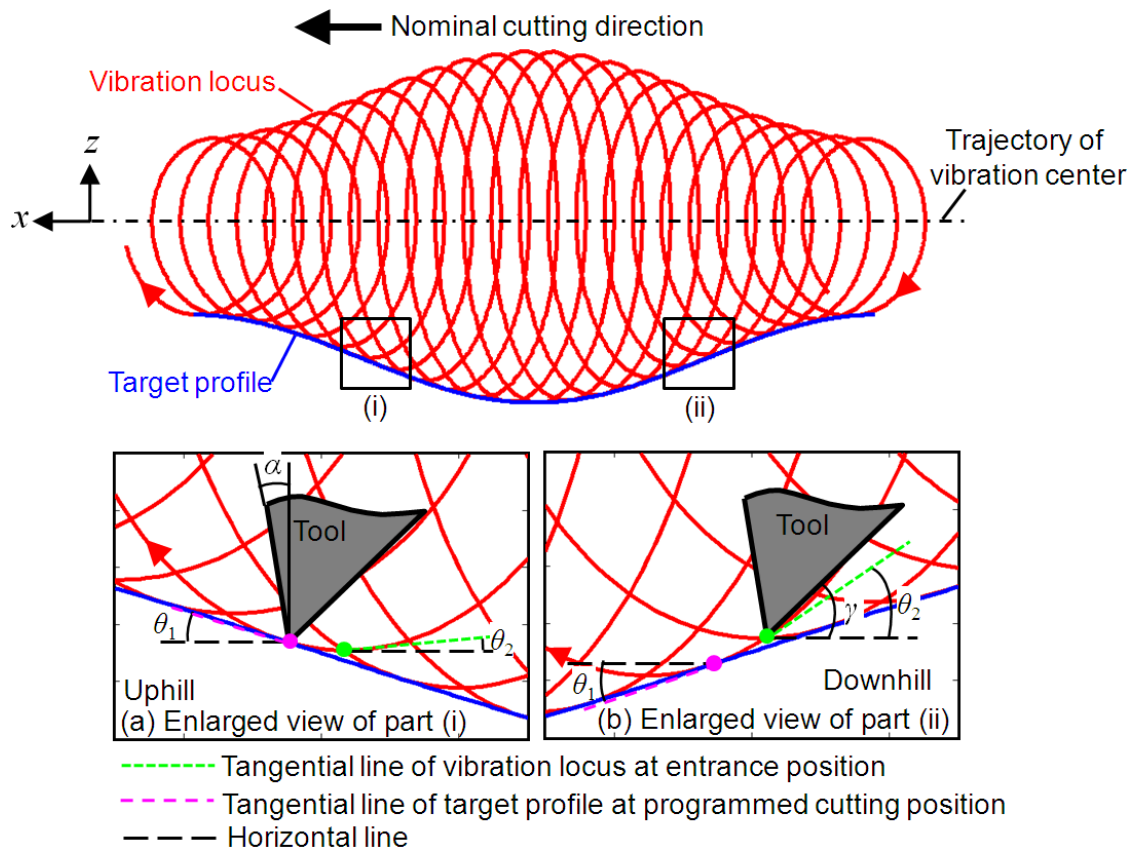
Illustration of machinable part geometry restricted by cutting tool geometry
